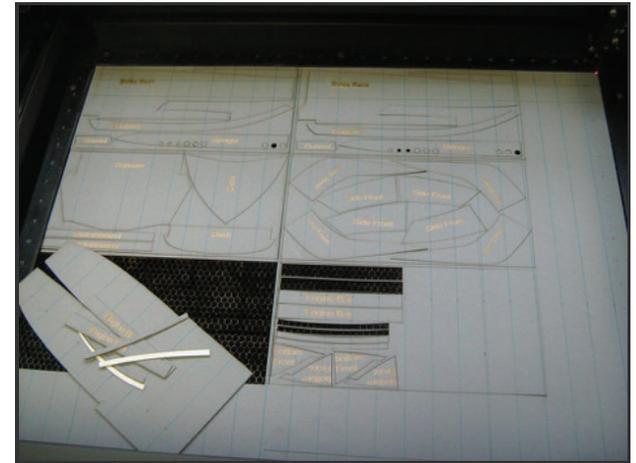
Laser cut mock-up components for the aluminum tram used to work out assembly and fabrication issues prior to production in the Wrangell Public High School's Marine Fabrication class.
